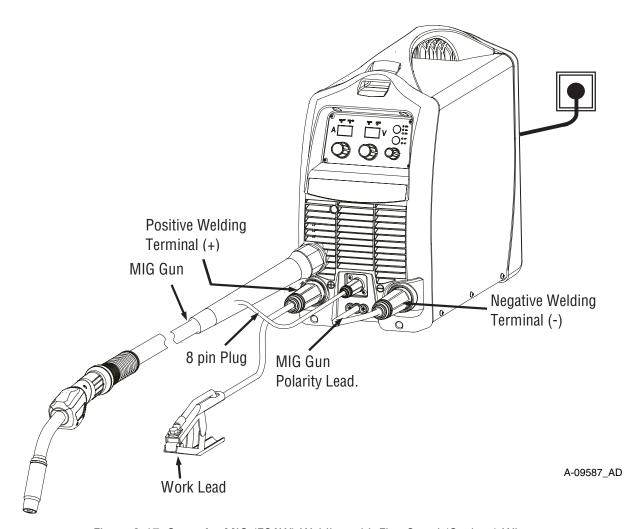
Setup for MIG (FCAW) Welding with Flux Cored (Gasless) Wire
